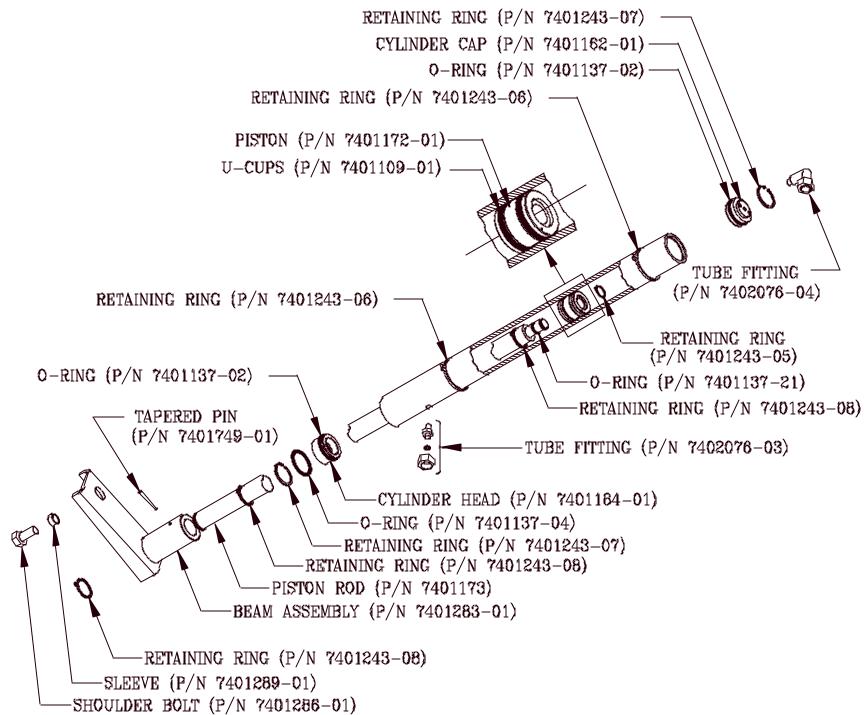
CONTHERM Hydraulic Lift Assembly, Without Hold Down
